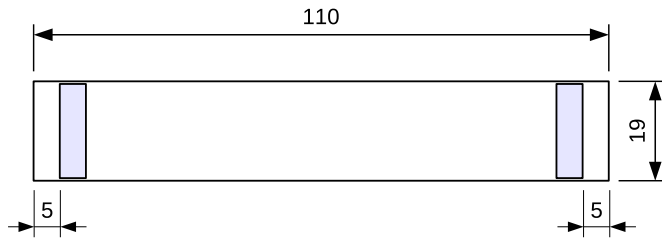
Design of a 200kHz prototype; plate's thickness is 1.9mm and the material is glass; dimensions are in mm.
